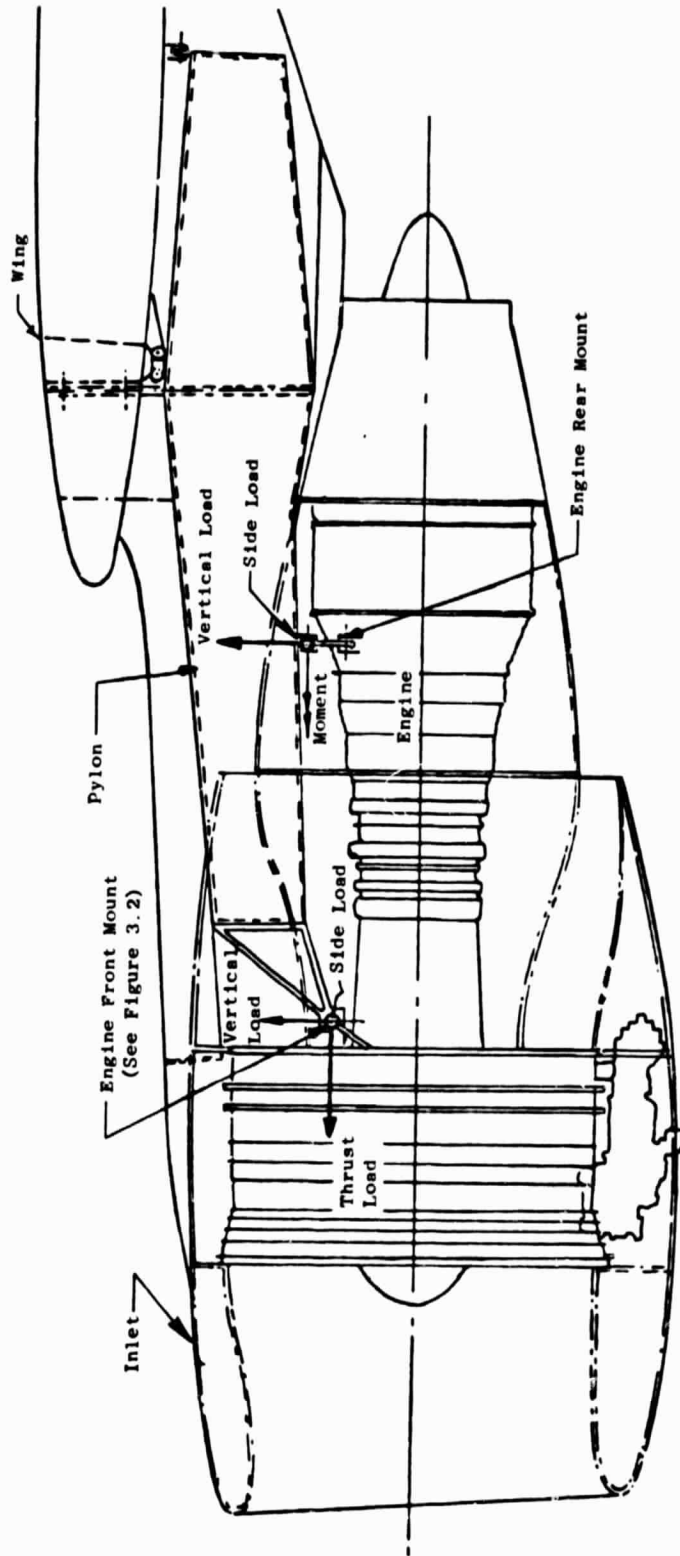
Typical Engine-Nacelle-Pylon-Wing Installation Showing Front and Rear Engine Mounts and Load Paths.
